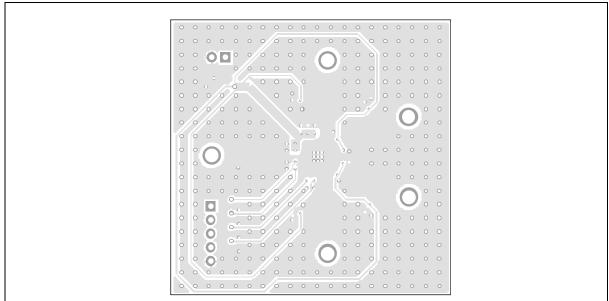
SL2150D evaluation PCB (Layer 3 view)
